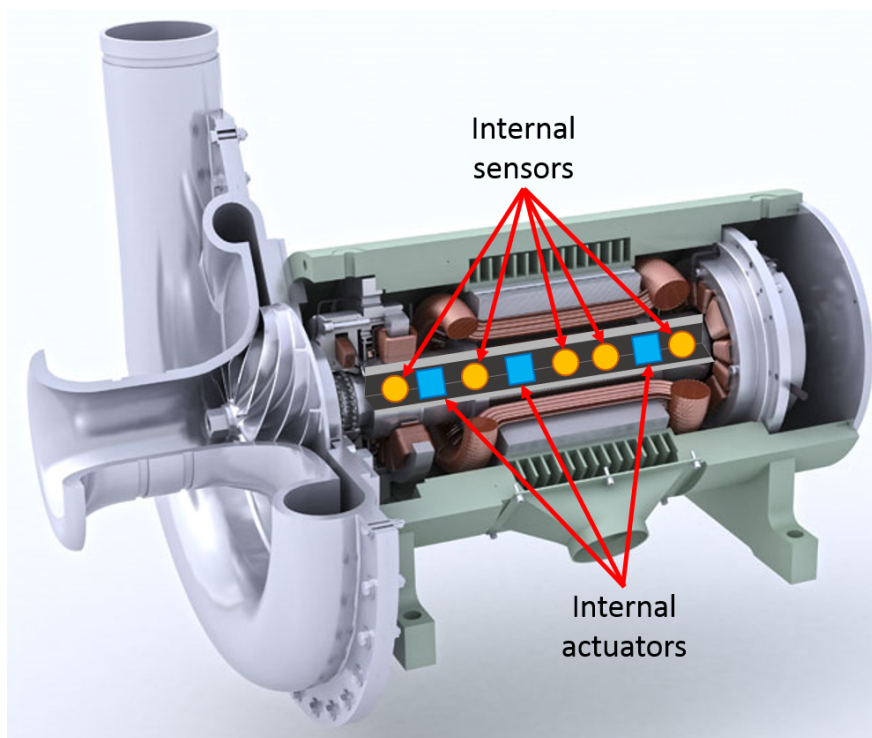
Rotating machine with active control system of the active rotor type. Adapted from original image courtesy of SKF.
